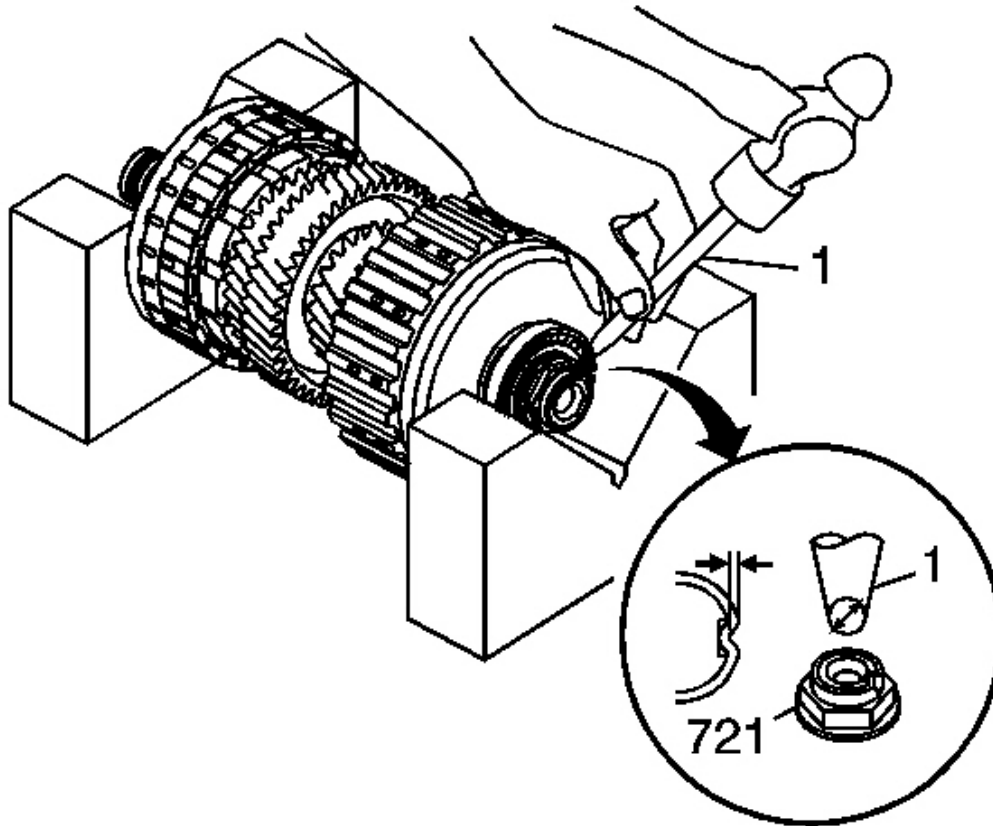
Staking The 1st And 2nd Clutch Shaft Retaining Nut Using A 3.5 mm Punch
